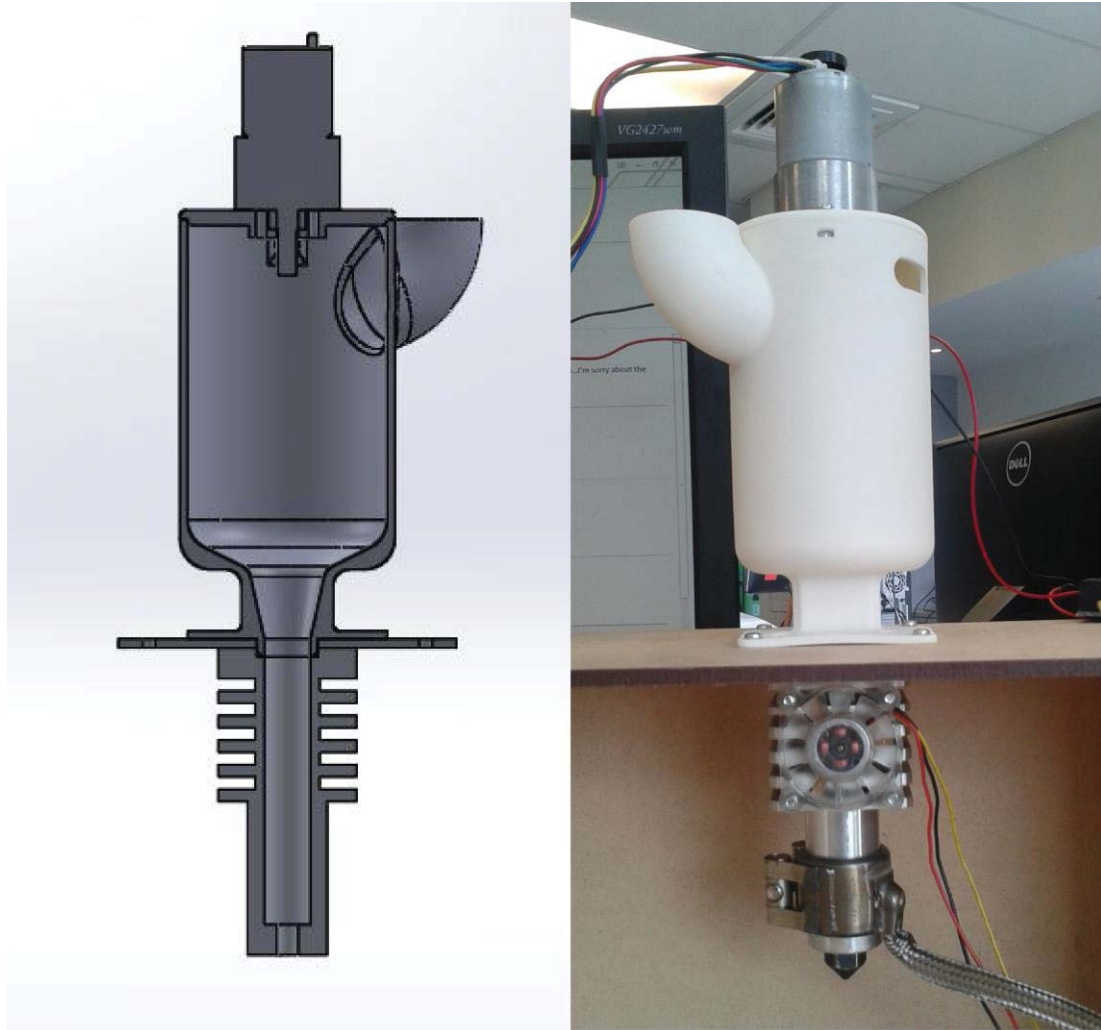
cross section of CAD model of extruder, and extruder attached to test platform
